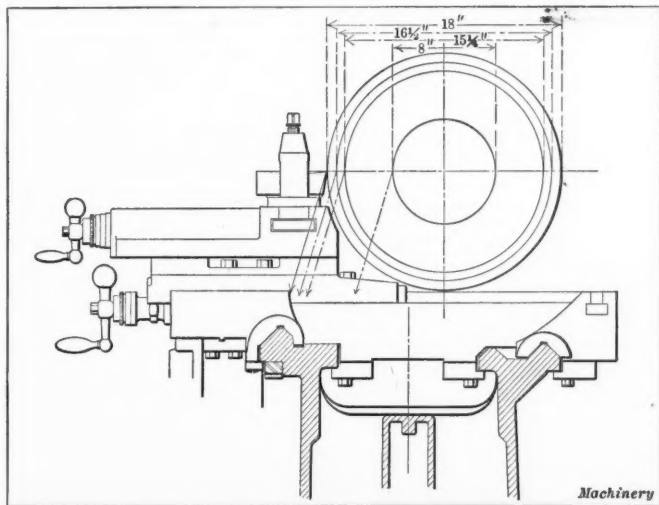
Cross-sectional View of Greaves-Klusman Lathe Bed
